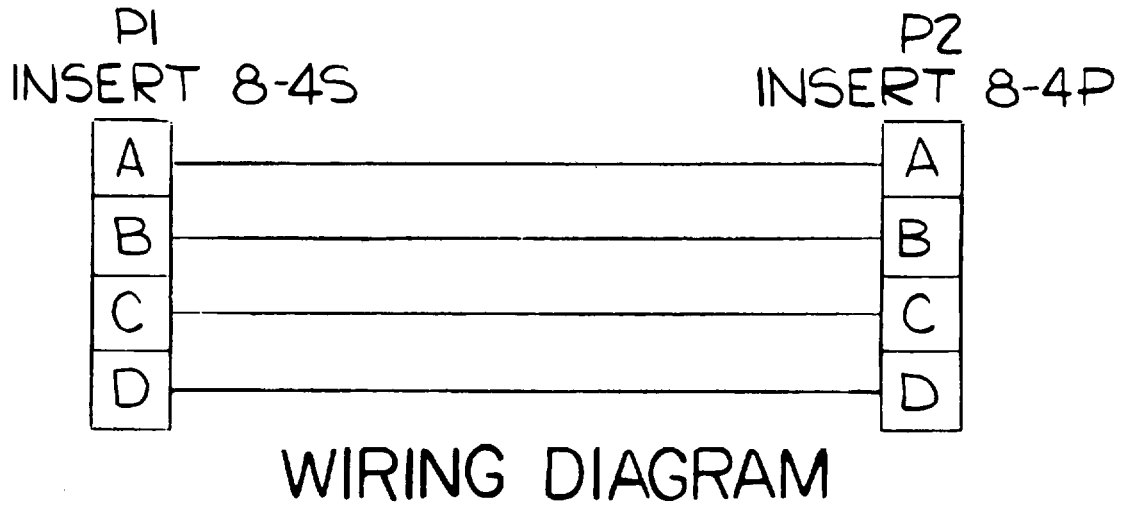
CA 1258 Cable Assembly (PT1561)
